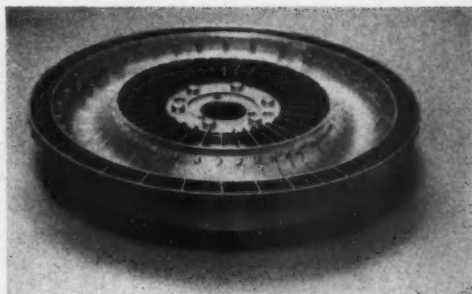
This air-conditioner impeller for use in aircraft is furnace-brazed. A fixture applies a load on each vane to maintain metal-to-metal joint contact during bonding
